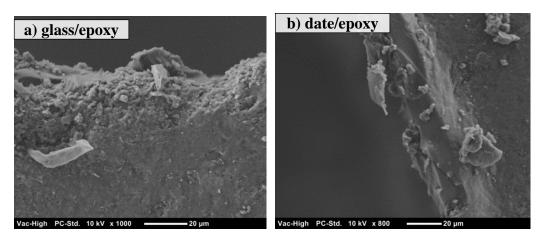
Micrographs of the inner side of the hole of the composites drilled at 120 rpm, 0.06 mm/rev and with a 3 mm drill diameter.
